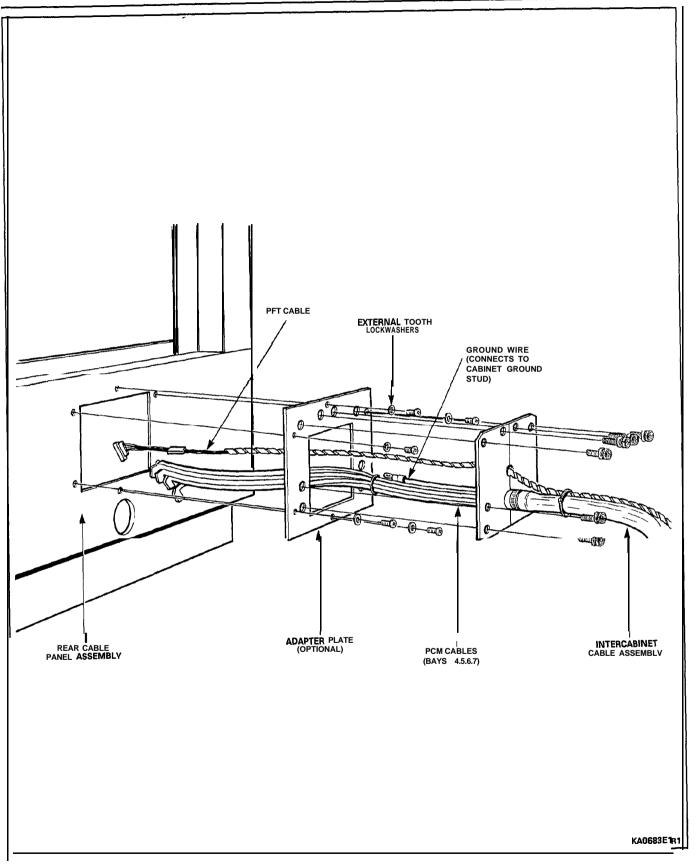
Installation of an Intercabinet Cable Assembly (672 port)
